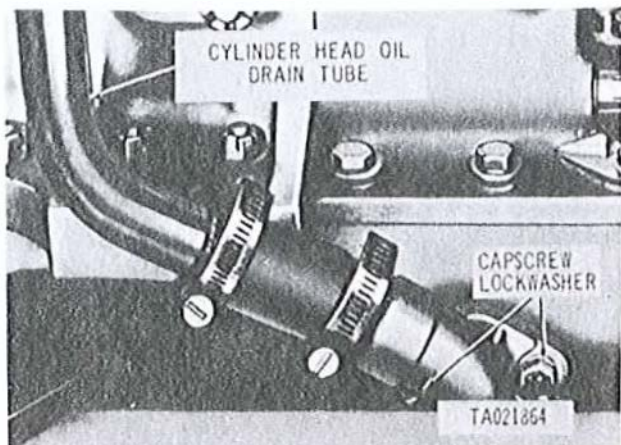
Disconnecting or connecting left front cylinder head oil drain tube.
